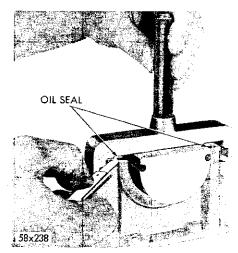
Trimming Rear Main Bearing Lower Oil Seal
